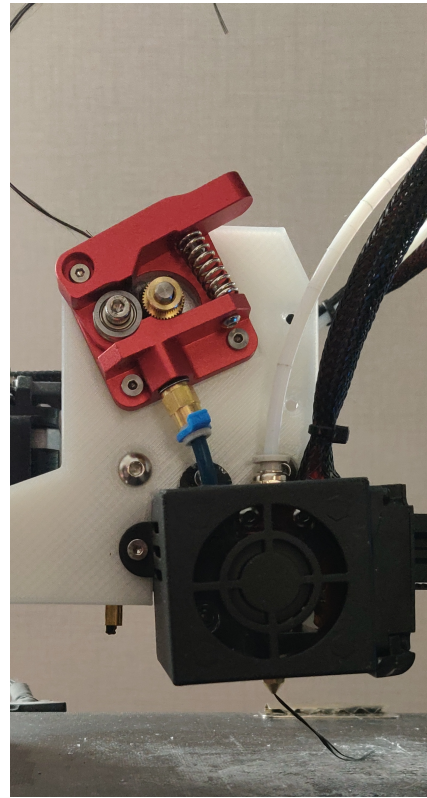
Drill holes in the *Ender 3* 3D printer to allow CCF's to be extruded through the nozzle together with thermoplastic.
